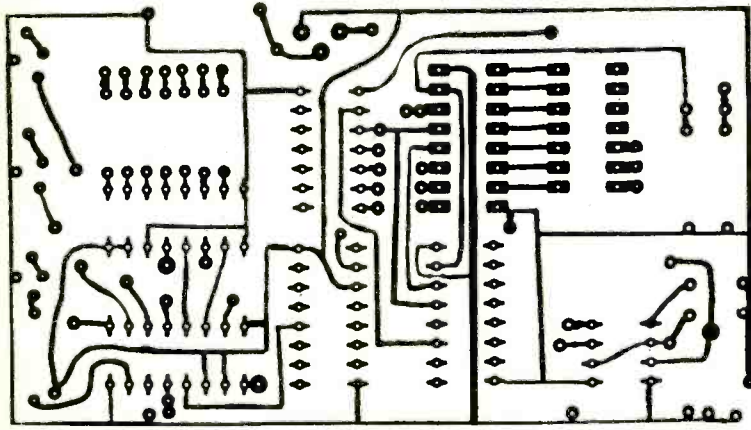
FOIL-SIDE pattern for printed circuit board is shown here without interconnection between the two section. Etch the board as one unit, then cut apart. Leave room at edges of each board section for mounting holes as required.
